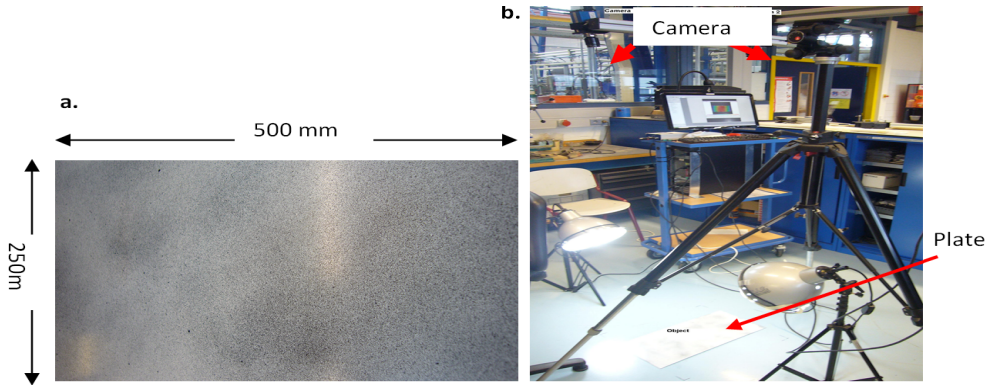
(a) An example of a speckle pattern used for distortion measurement of AISI-316L plate before welding and (b) the experimental arrangement.
